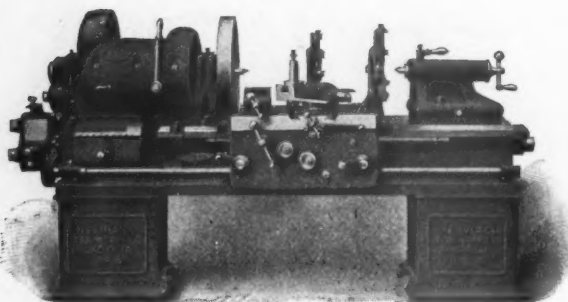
20-IN. LATHE WITH ALL GEAR HEAD.
